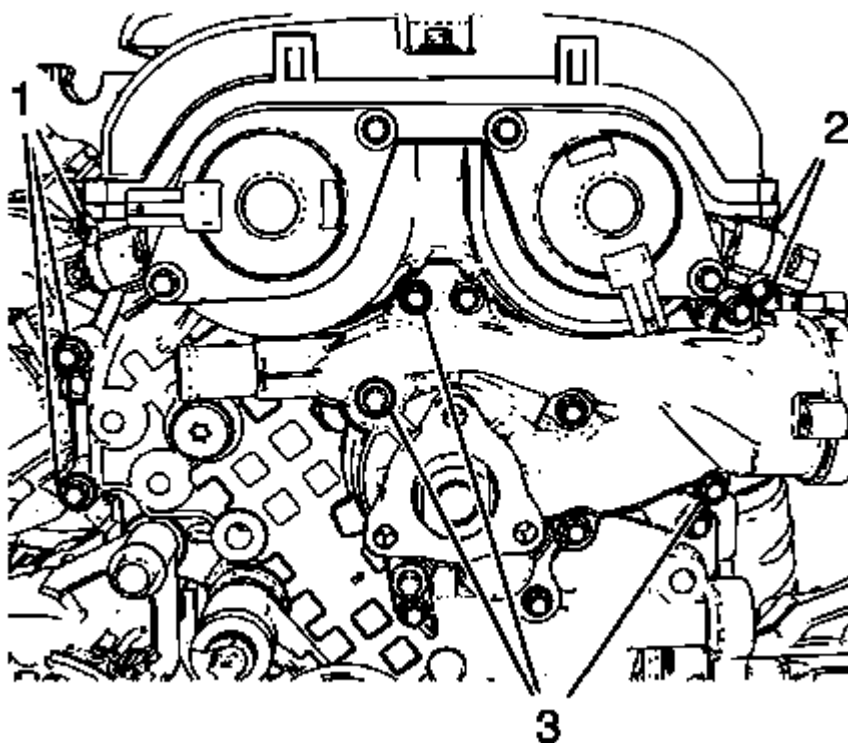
Engine Front Cover Bolts And Water Pump Bolts
